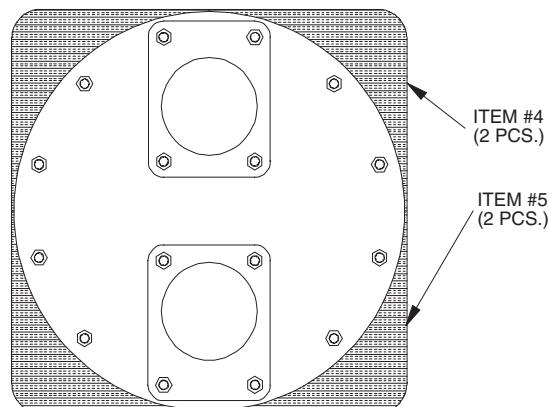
Outside Tubesheet Face (Fully Insulated)
